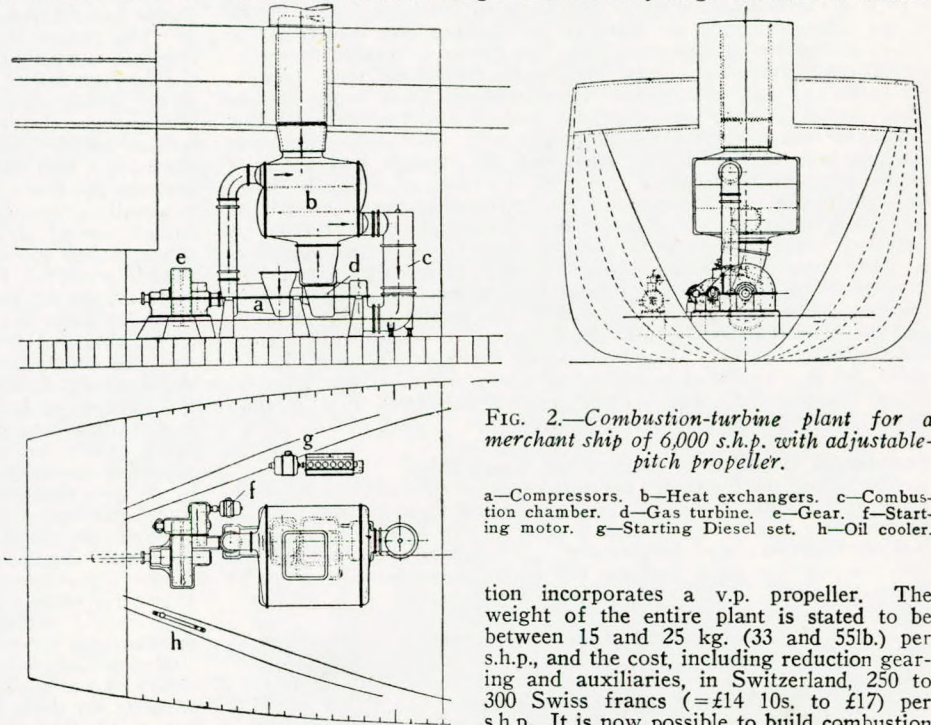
Combustion-turbine plant for a merchant ship of 6,000 s.h.p. with adjustable-pitch propeller.
